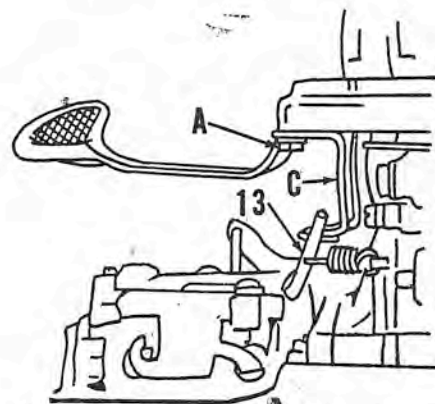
On Lightwin motors a cam (C) is attached to bottom of armature plate as shown. When speed control lever is moved, cam follower (13) is actuated to open carburetor throttle valve. To synchronize, loosen screws (A) and proceed as outlined in text.
